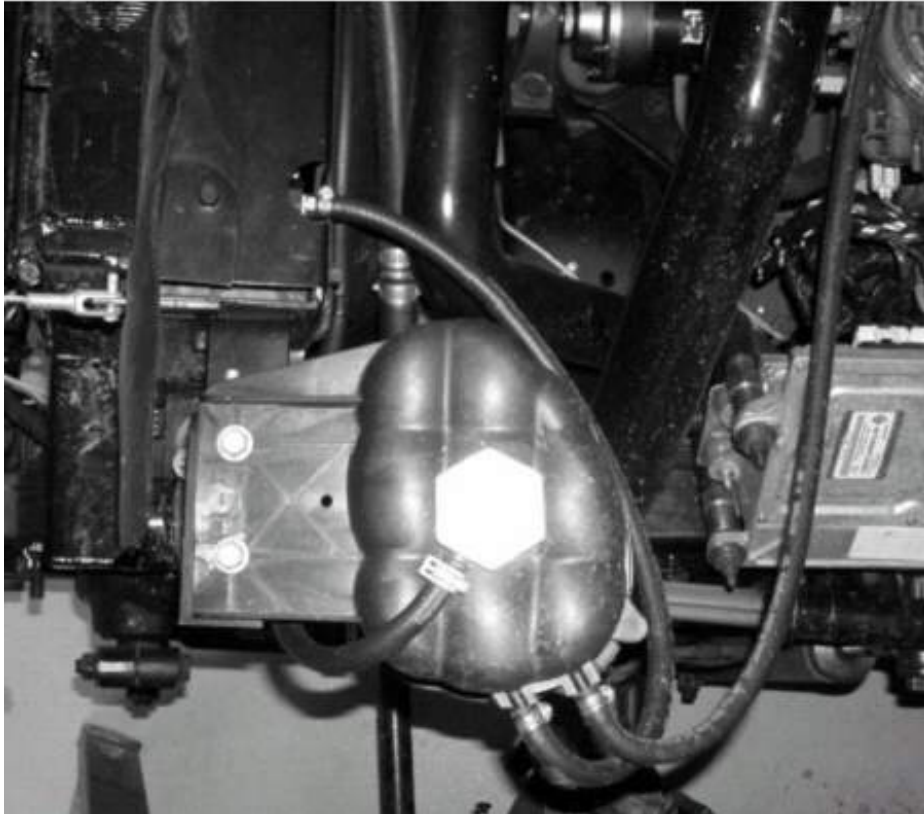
Properly Installed Passenger Side CAC Connecting Hose and Constant Tension Spring Clamps – Showing the AC Lines
